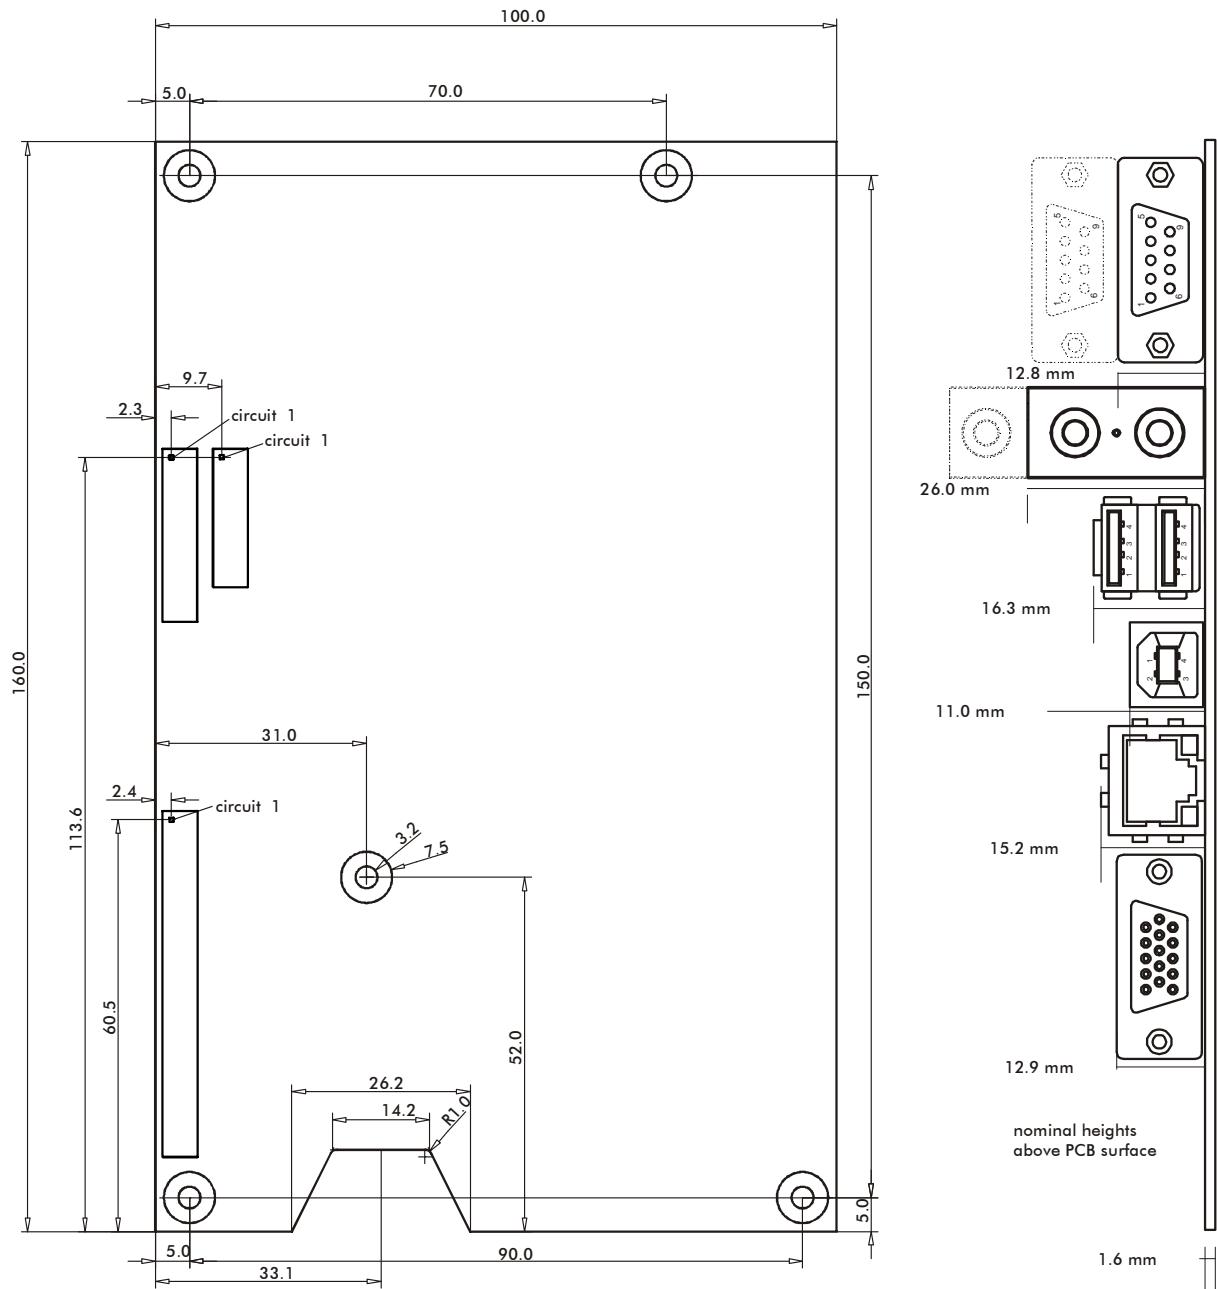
Mechanical Drawing and Mounting Hole Positions
